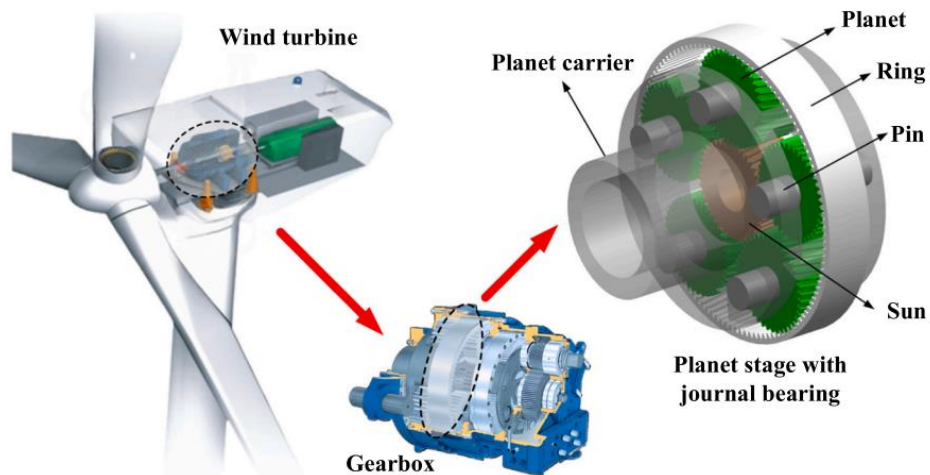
Schematic of a wind turbine gearbox with journal bearing [1].
